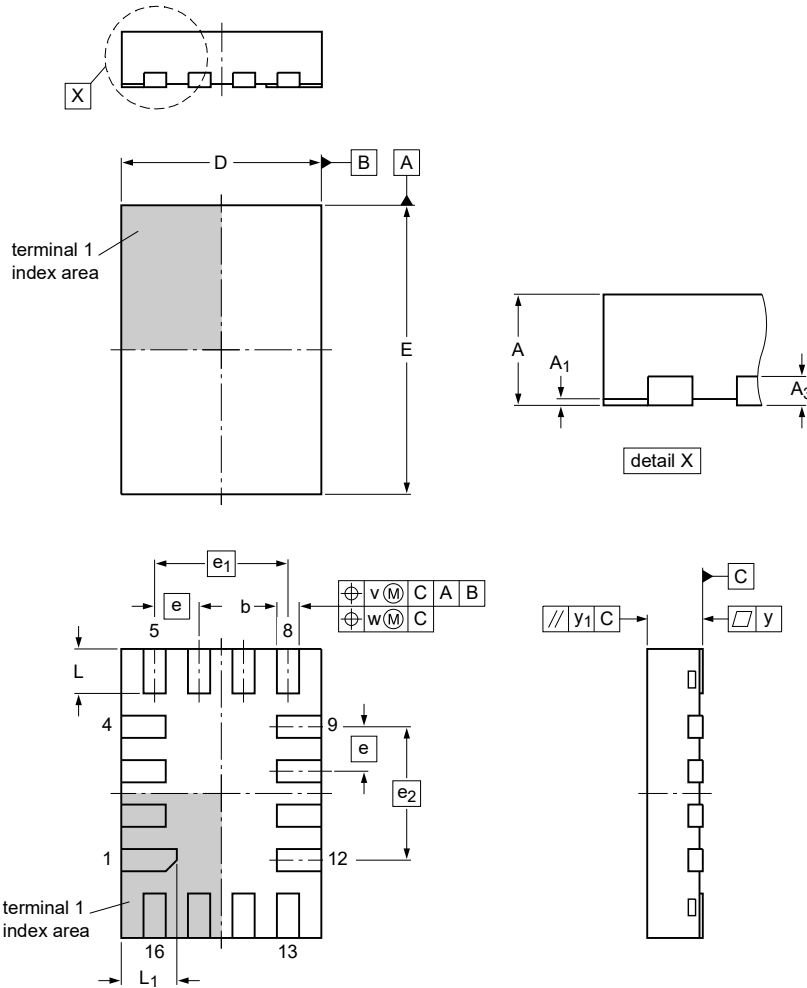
Package outline SOT1039-2 (HXQFN16(U))
